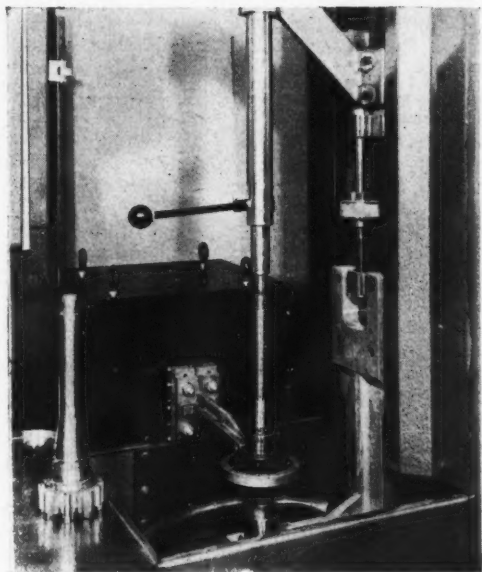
Close-up view of the heating coil and work-holding arrangement at one of the induction hardening stations on the machine shown in Fig. 1
